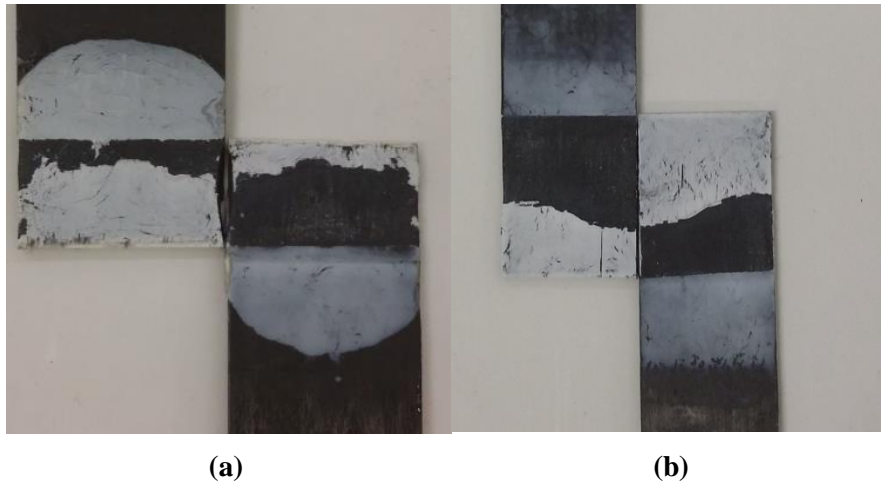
Failure modes of SikaPower 4720 in impact specimens. (a) 12.5 mm (b) 25 mm.
